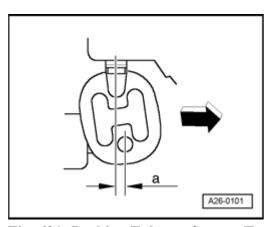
Pushing Exhaust System Toward Front Of Vehicle
